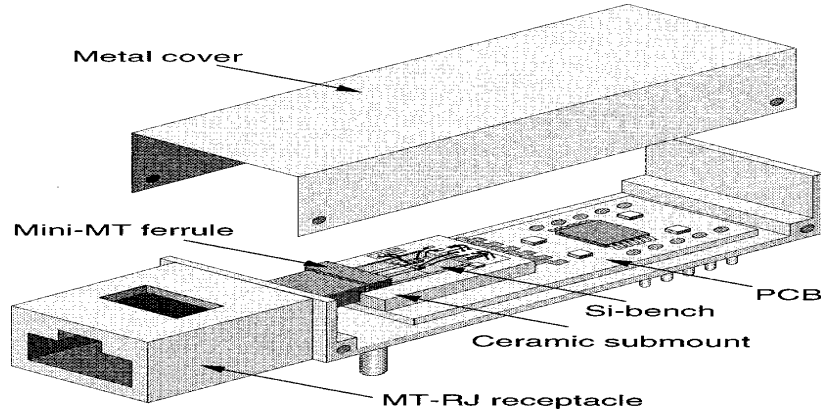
Construction of the transceiver with optical subassembly by surface mounted structure.
